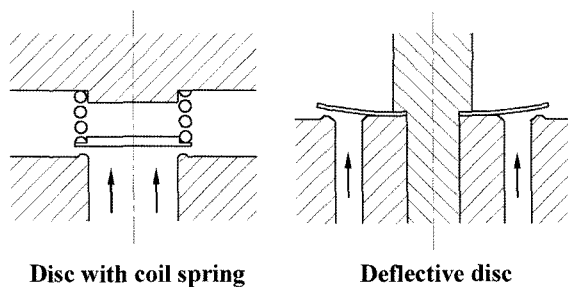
Two kinds of valves usually used in hydraulic dampers.
